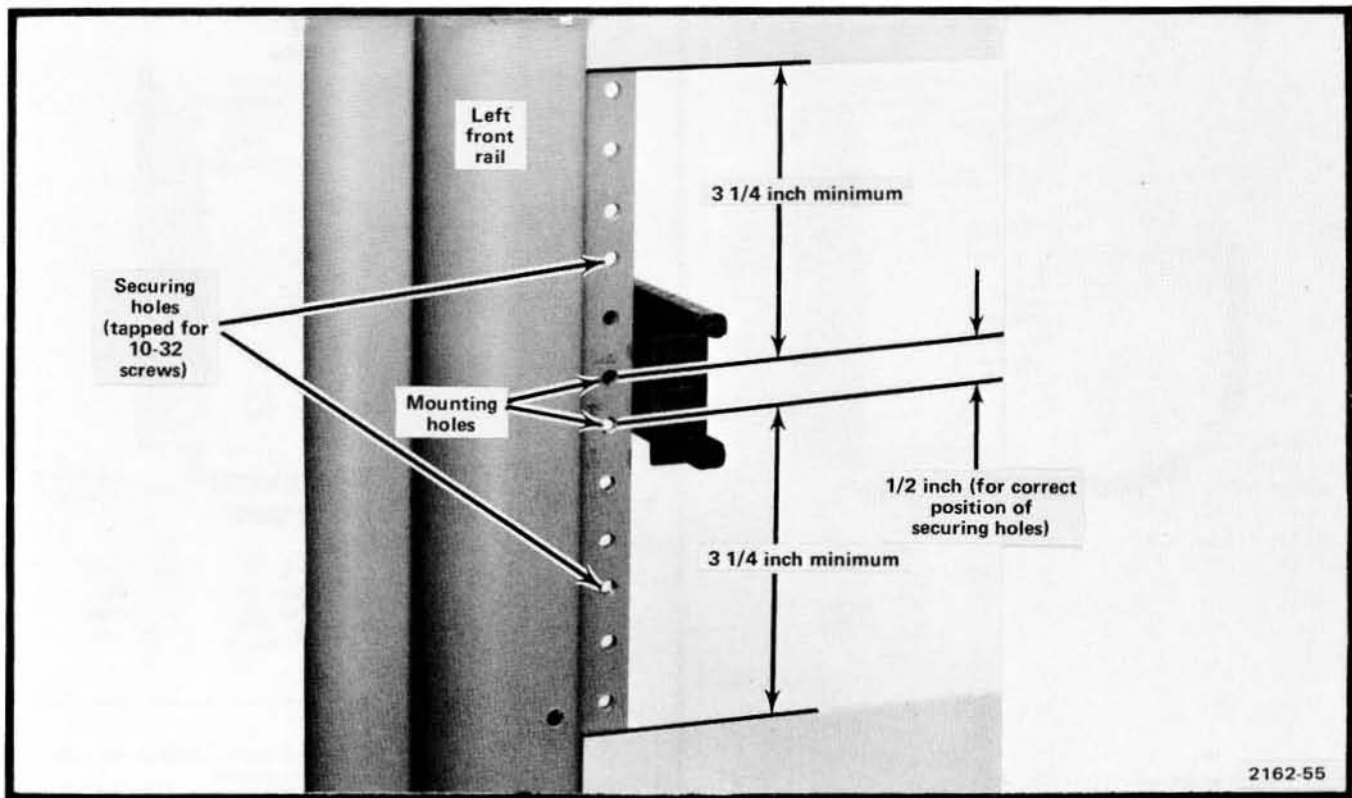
Locating the mounting holes for the left stationary section. Same dimensions apply to right stationary section.
